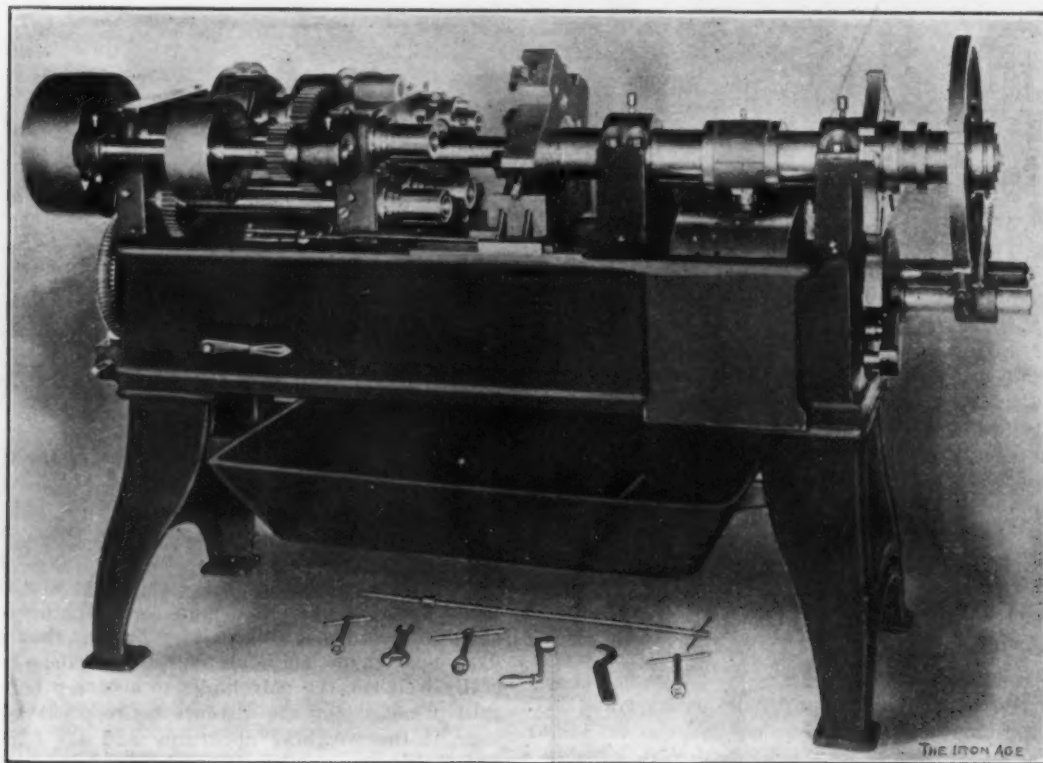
Front View of the Prentice Four-Spindle Automatic Turret Machine.
